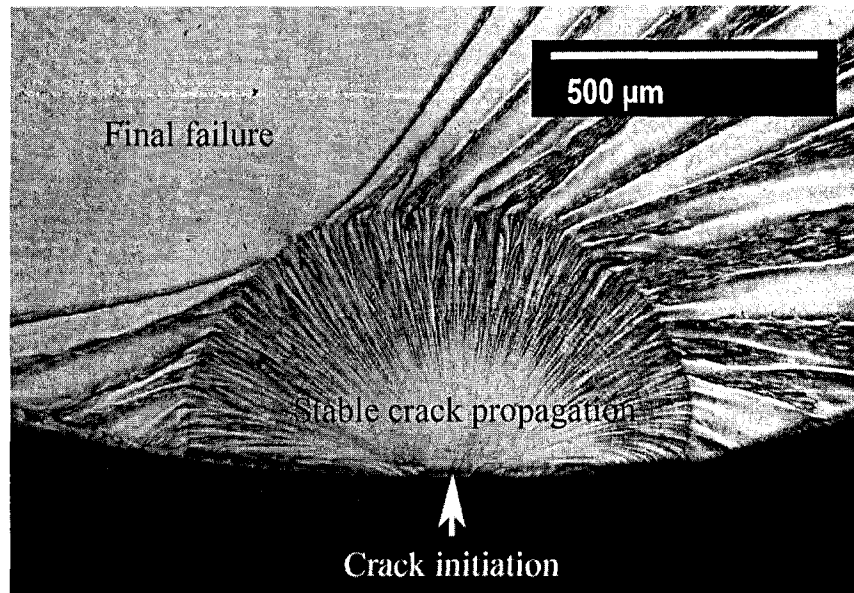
Fracture surface of the fatigue crack initiated from the specimen surface.
